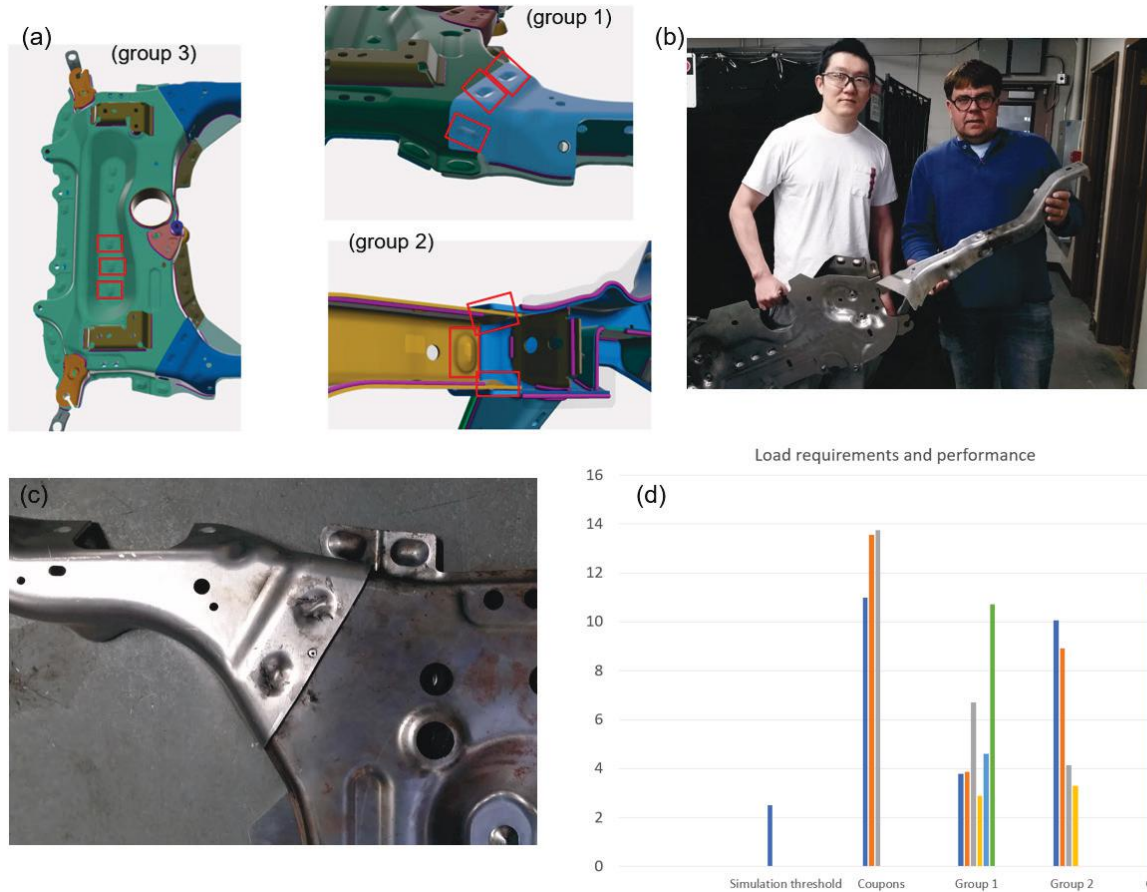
Testing of prototype welds: (a) the regions where welds were cut, (b) project participants Y. Mao and J. Wright holding the welded sub-components, (c) a VFAW sub-component, and (d) the failure loads of prototype welds compared to the baseline. Source: The Ohio State University.
